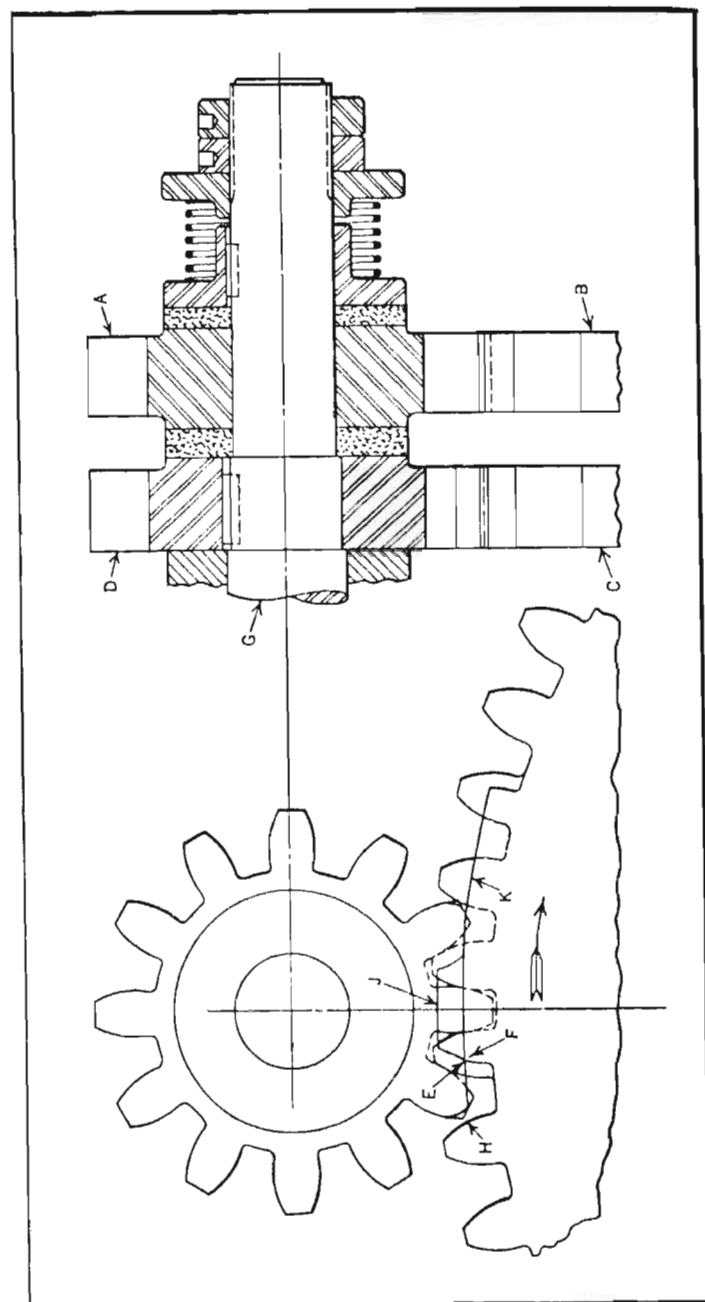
Intermittent Gear Train in which Impact Shocks are Reduced by a Friction Gear Drive that Starts Each Indexing Movement
